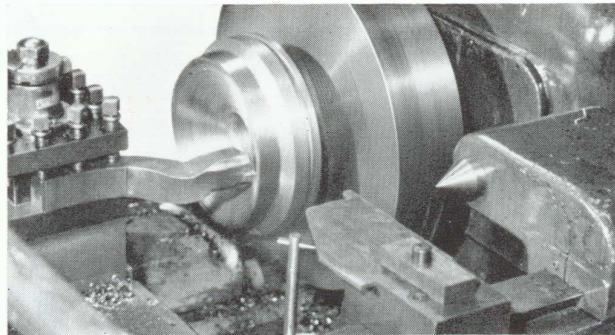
shows the finish boring of Diesel Traction Motor Suspension Bearings using extension boring bars held in the 4-way tool block and flat template. The five operations which include the turning, facing and boring of the bronze and of the babbitt lining are completed in 52 minutes floor to floor.
